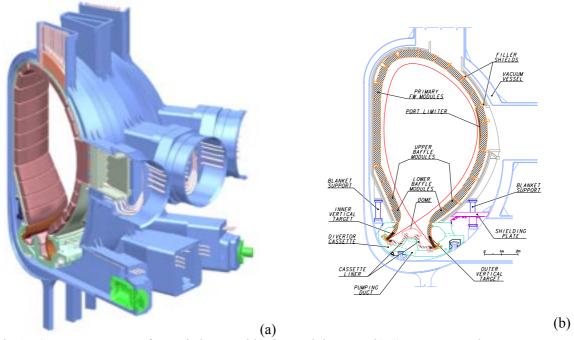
a) Isometric view of vessel showing blanket and divertor. b) Cross-sectional view.
